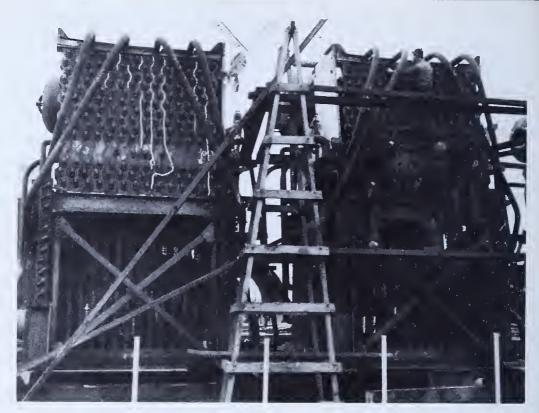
Rear View of Boilers Ready for Preliminary Hydrostatic Test
